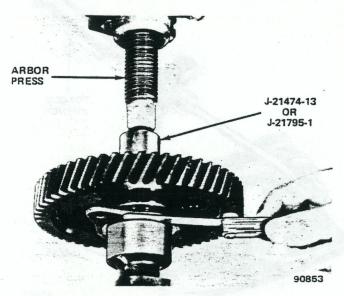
B-13 Installing Camshaft Timing Gear and Measuring Thrust Plate End Clearance
